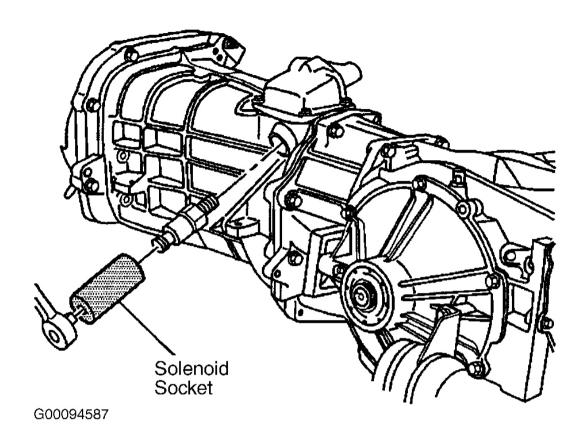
Removing & Installing Gear Select/Skip Shift Solenoid Courtesy of GENERAL MOTORS CORP.
